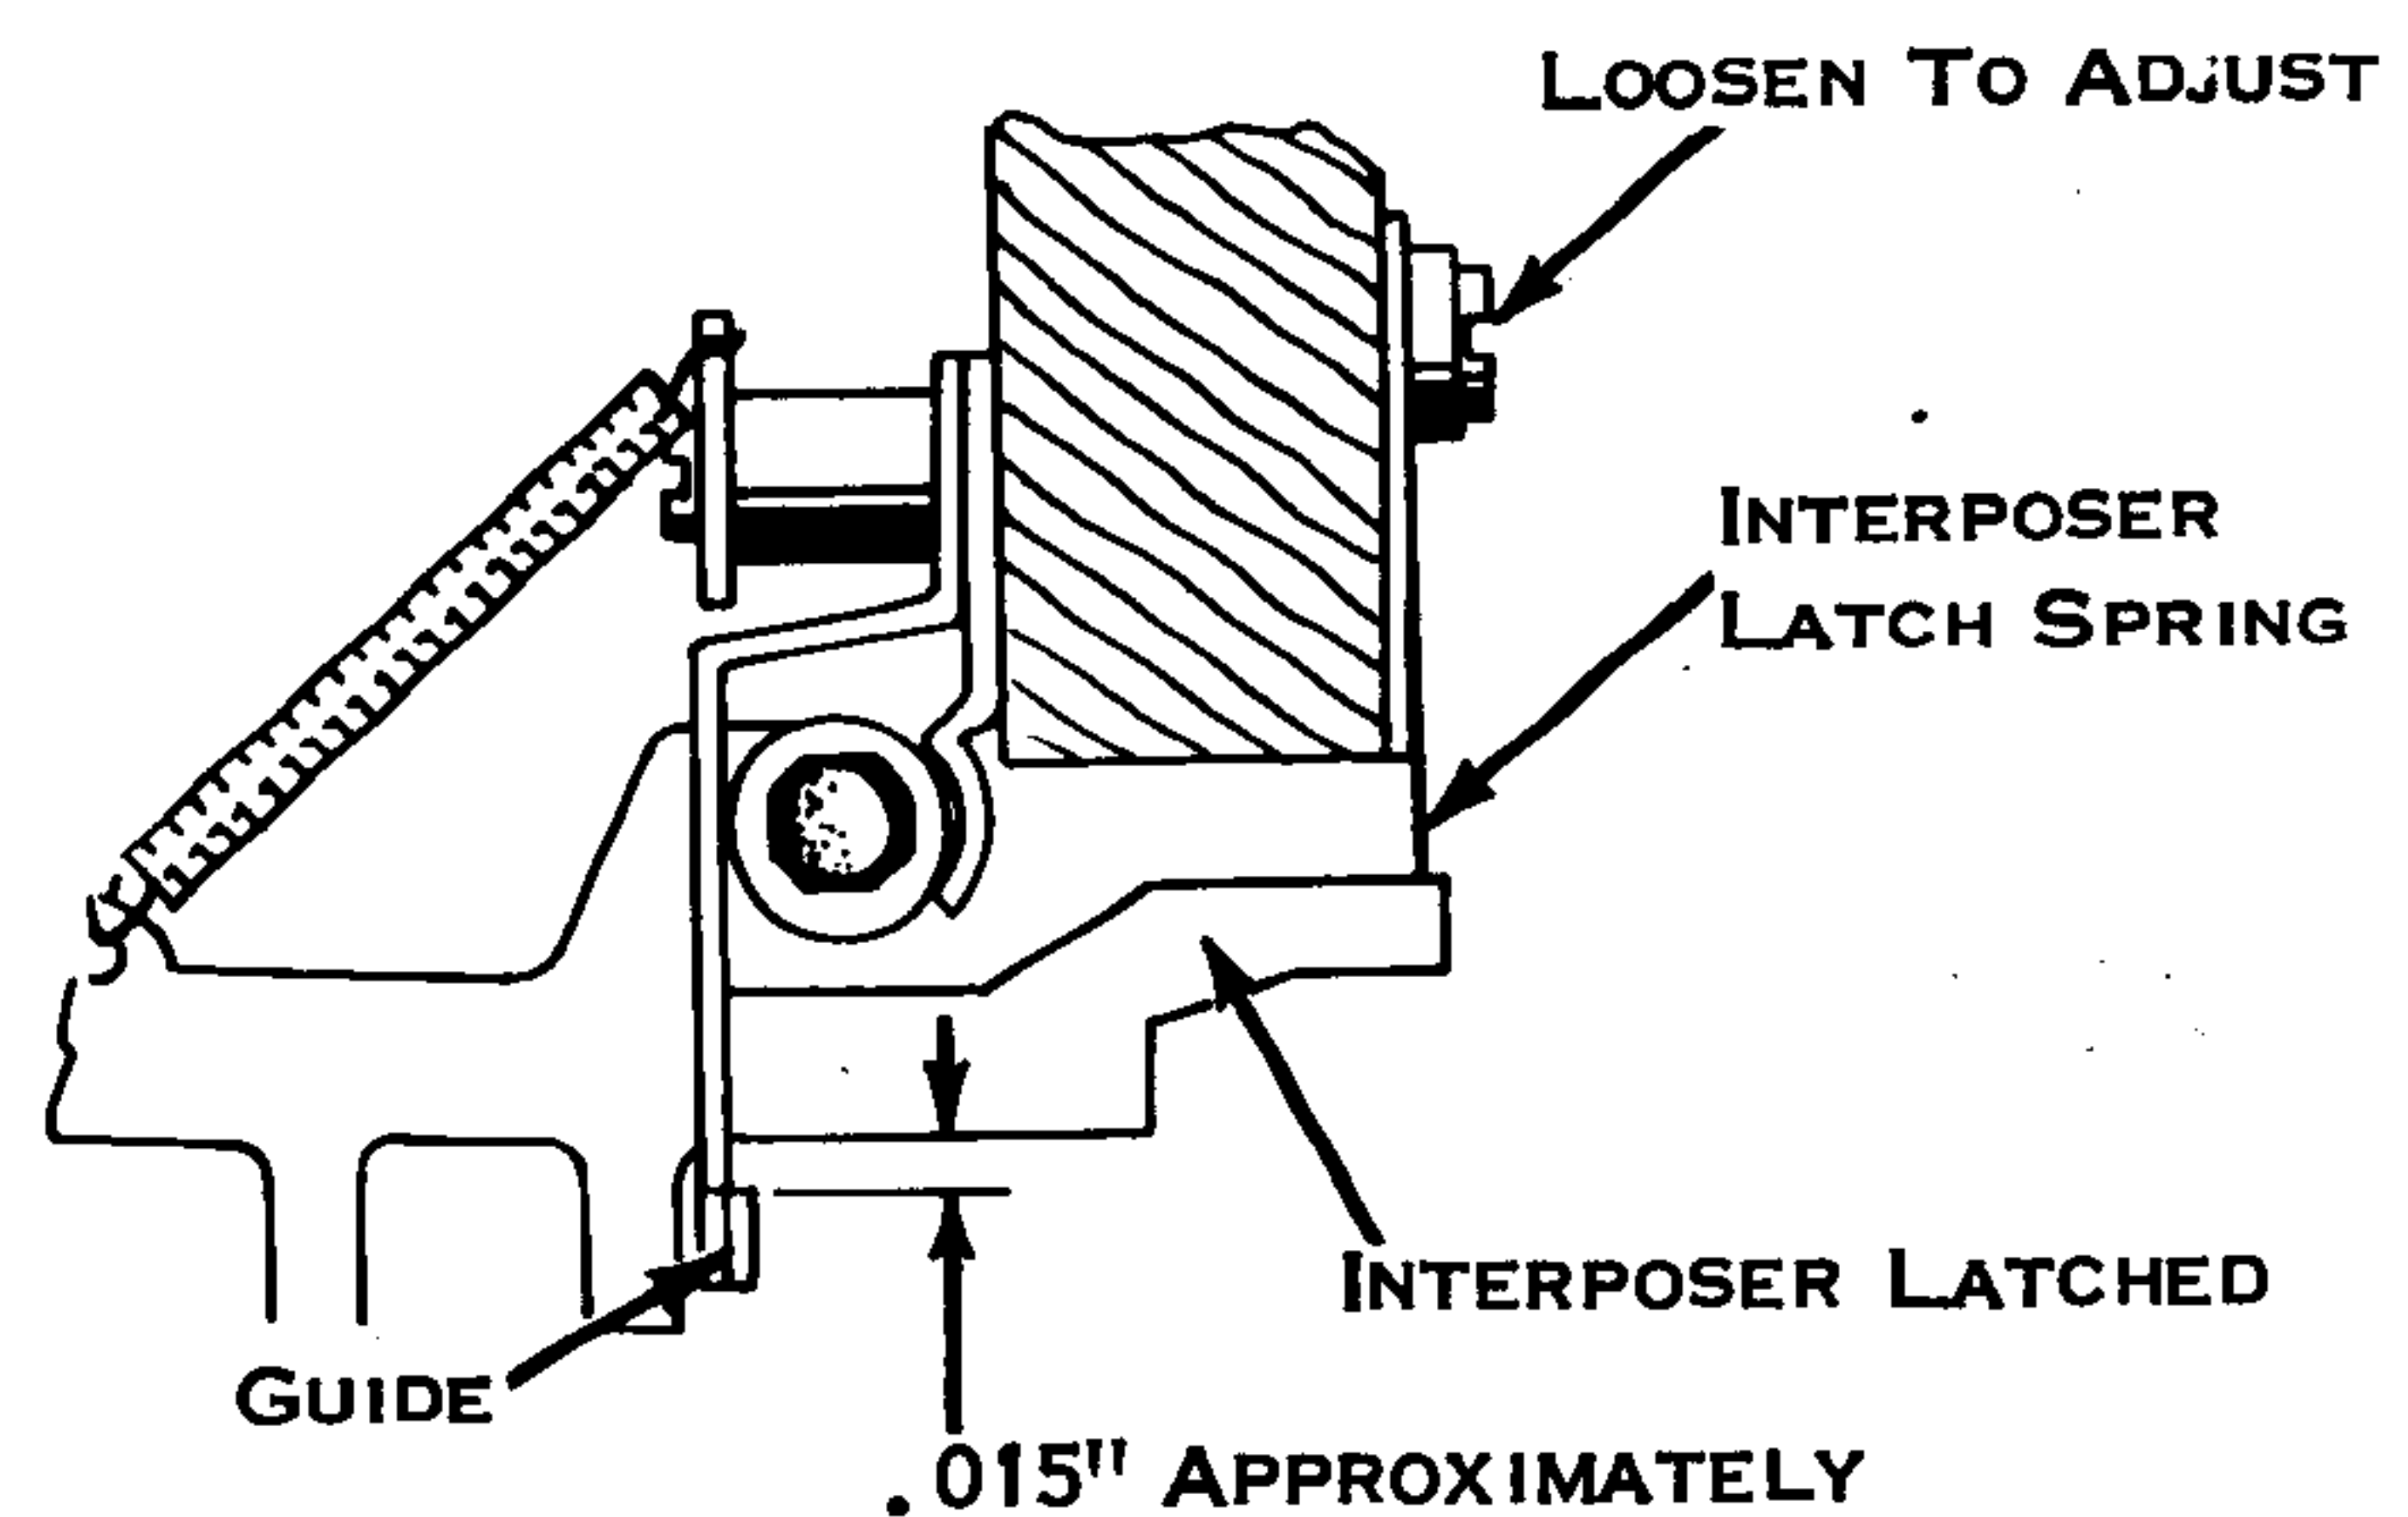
Interposer Latch Spring Adjustment, Preliminary
